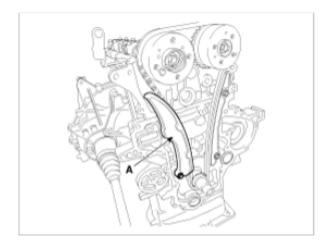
Identifying Chain Tensioner Arm Courtesy of HYUNDAI MOTOR AMERICA
